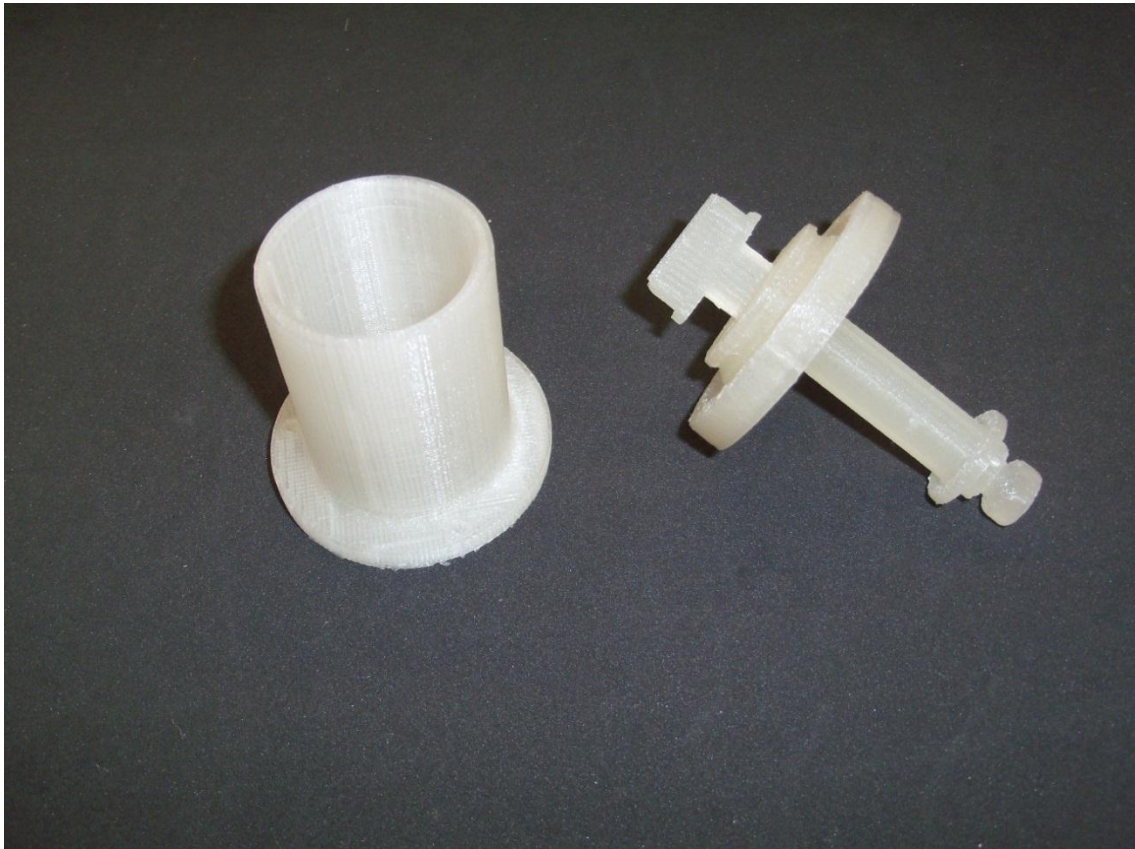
FIRST PROOF OF CONCEPT. SMALL CLEARANCES BETWEEN FIXTURE AND TEMPERATURE CHAMBER REQUIRED A REDESIGN.
